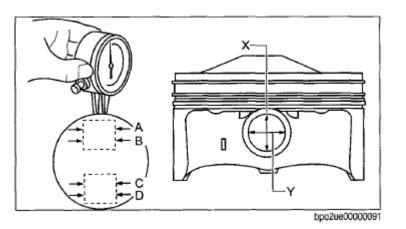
Measuring Piston Pin Hole Diameter Using Caliper Gauge
